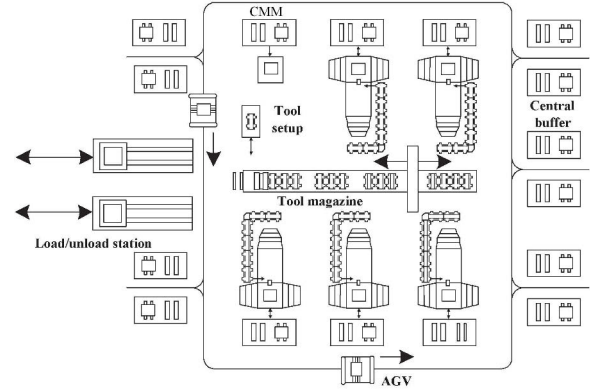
FMS with several machines, a coordinate measuring machine (CMM), AGVs and a central tool magazine.
